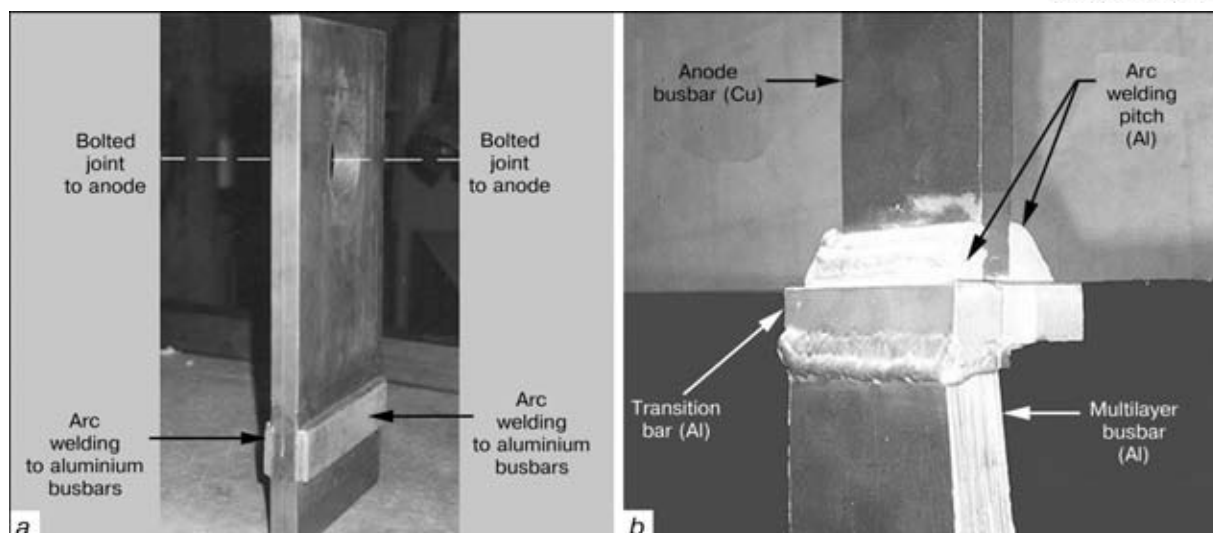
Appearance of the copper busbar explosion clad on two sides with narrow aluminium strips (*a*), and appearance of a welded joint between the flexible aluminium busbar and the copper busbar (*b*)
